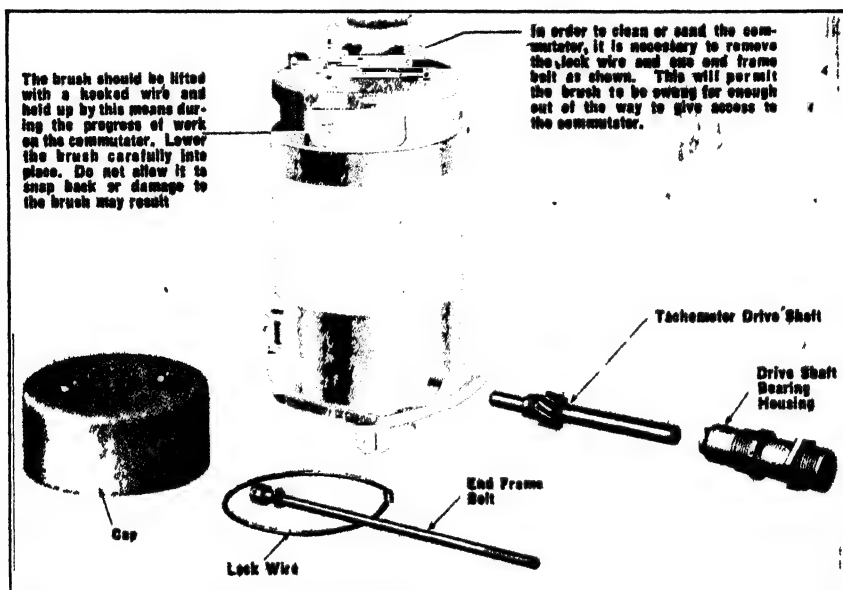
The Liberty Engine Generator Removed from the Motor.
